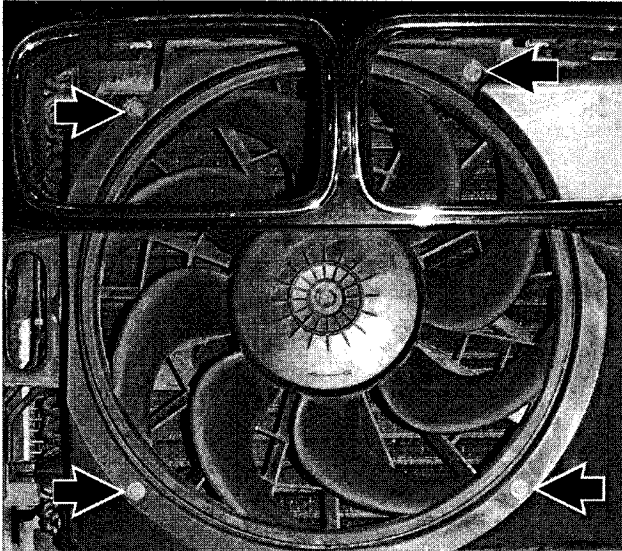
Version 2 auxiliary fan mounting screws (arrows). Front bumper has been removed.
